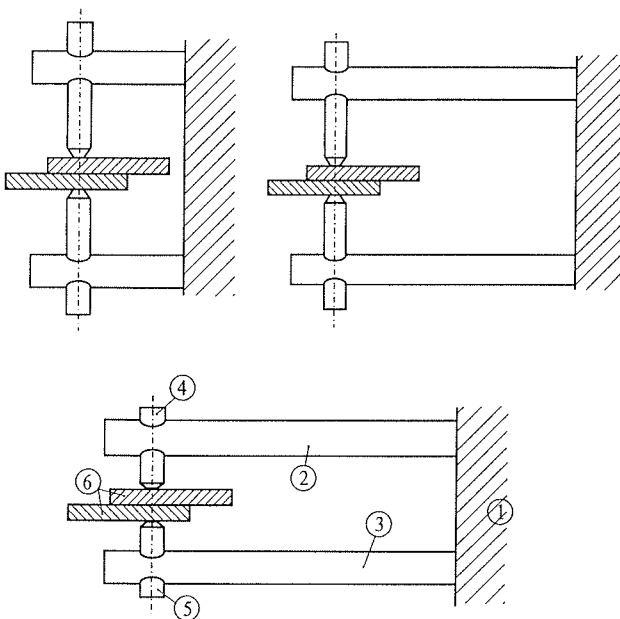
Different throat areas in resistance spot welding machines. 1 - resistance spot welding machine, 2 - upper electrode holder, 3 - lower electrode holder, 4 - upper electrode, 5 - lower electrode, 6 - workpieces.
